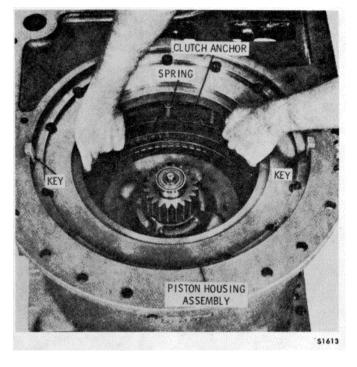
Removing Third-and-Fourth-Gear Clutch Piston Housing and Piston
